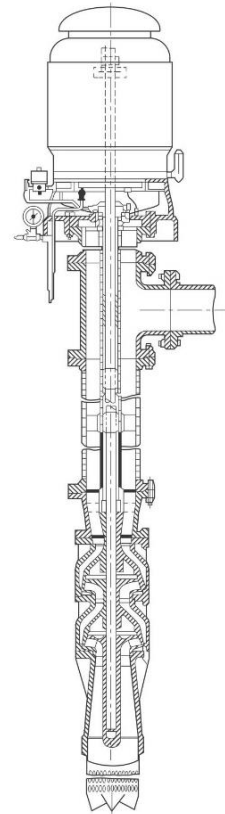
Water-Lubricated and Oil-Lubricated Shaft Pumps.
